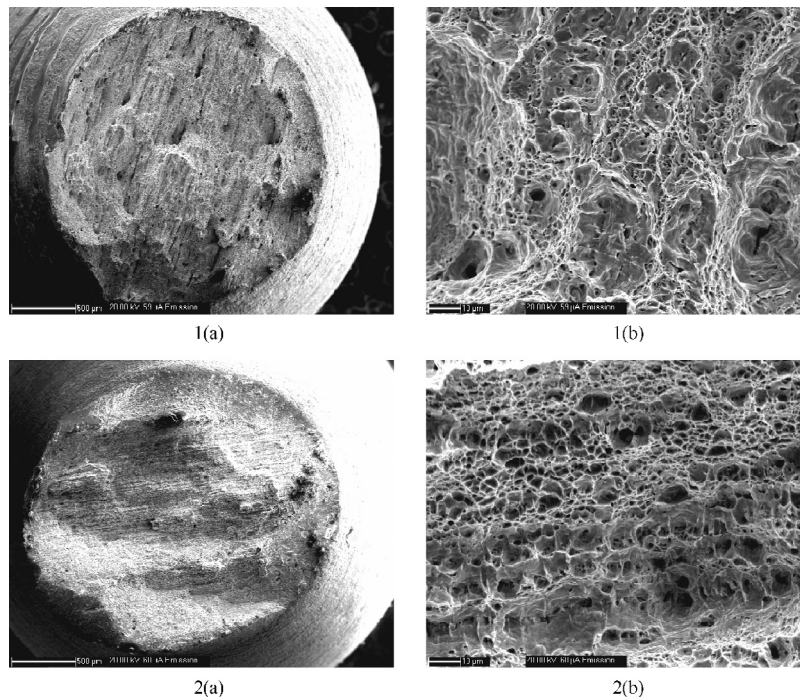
Fractured tensile test specimen images (1) SMAW (2) A-GTAW.
